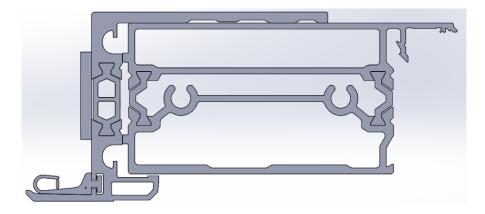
Cross sectional view of the frame stile and tube stile mounted together.
